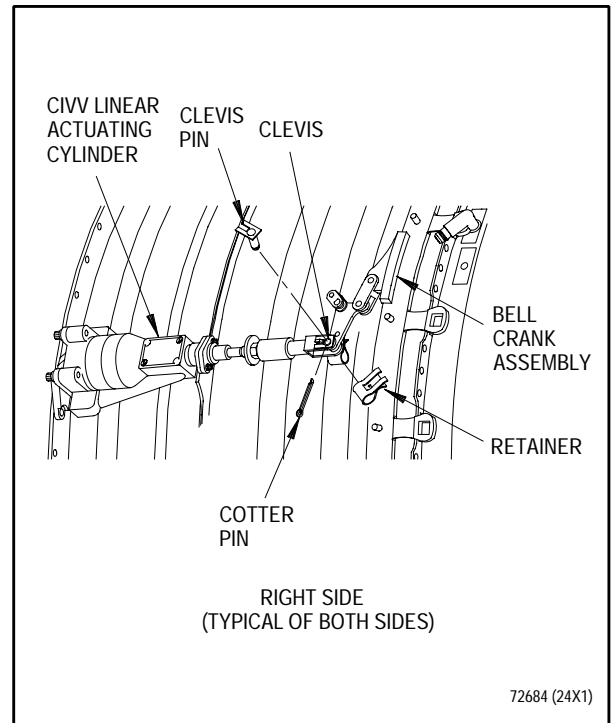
Compressor Inlet Variable Vane System - Rigging (Sheet 4 of 6)
